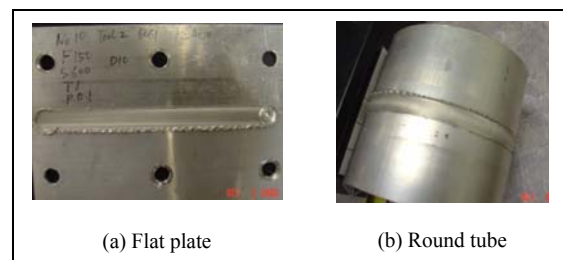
Aluminium flat plate and round tube welded at NMMU
